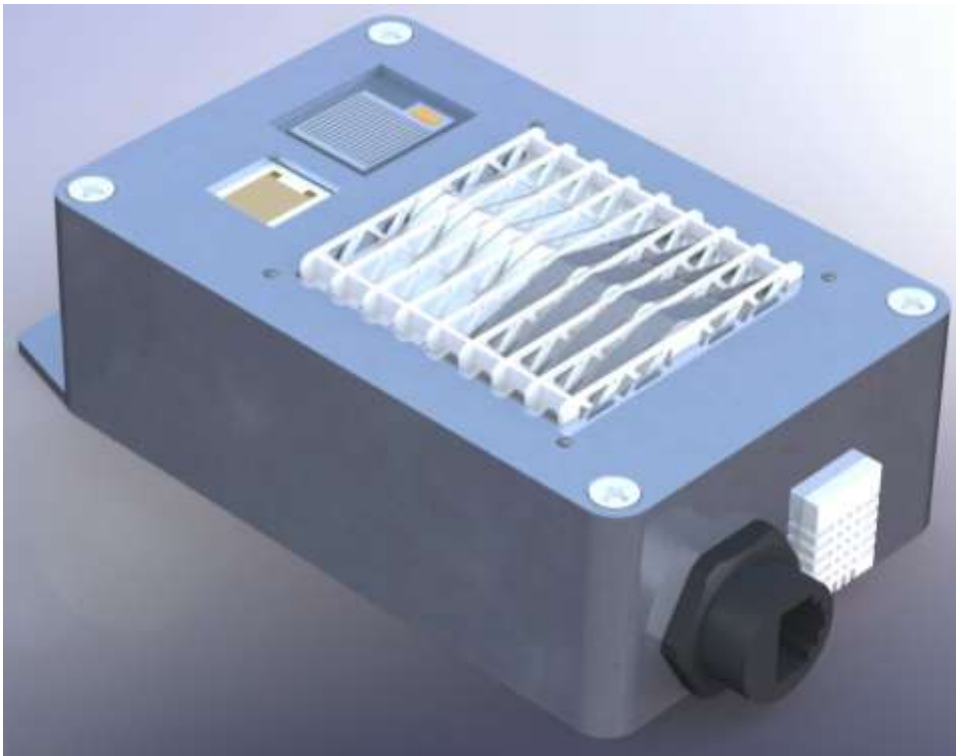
Boise State Barnacle V3 Daughter Boards Mounted. The board on the left is the corrosion sensor board and the board on the right is the TOW sensor board.
